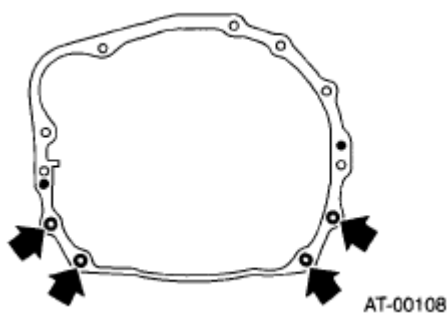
Locating Lower Side Of Transmission To Engine Bolts And Nuts - AT Model
